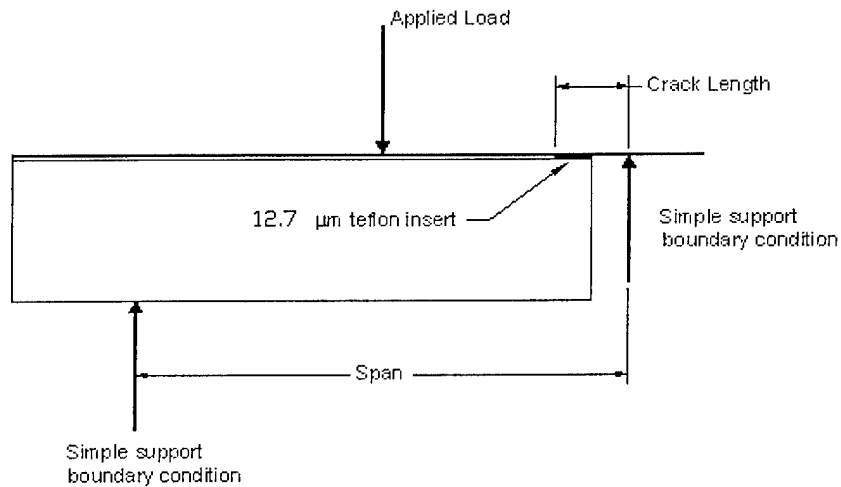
SKIN-STRINGER GEOMETRY SUBJECTED TO BENDING LOADS
